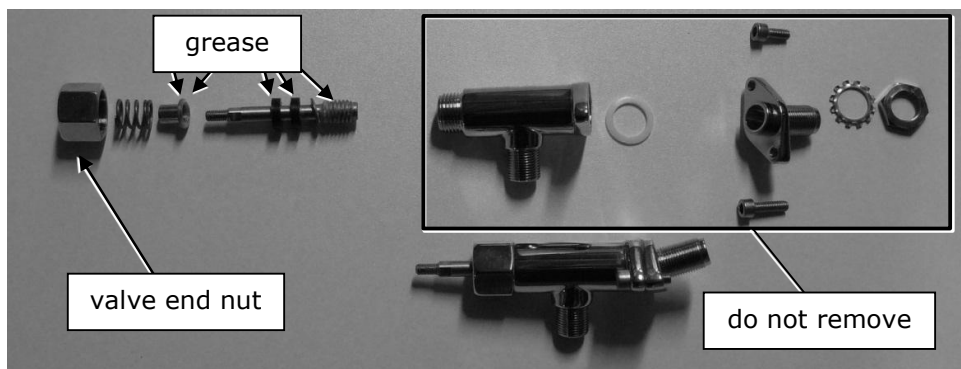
Exploded view of hot water valve and assembly. The valve itself will remain on the machine. The rubber sealing rings are not removed from the valve shaft.
